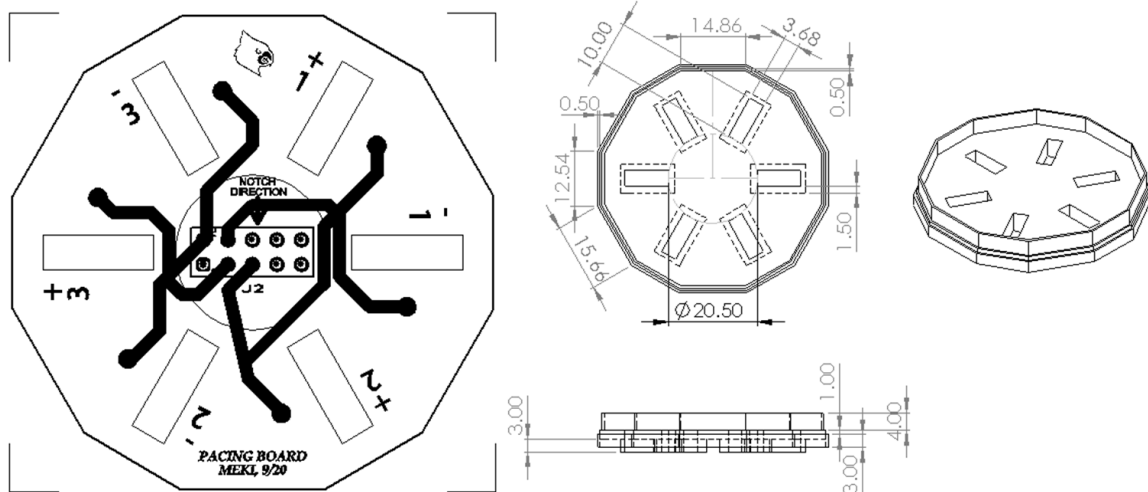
A- Custom interface PCB with C-PACE-EM system, B- 3D printed cover with sockets for 6 electrodes for electrically stimulating heart slices.
